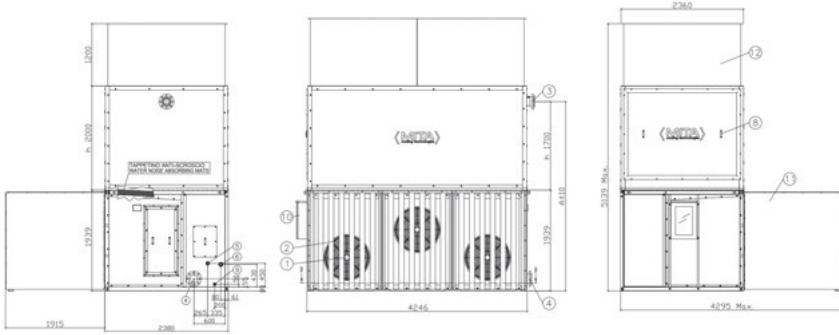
Selection card and drawing of a cooling tower: Parts: 1 – fan, 2 – fan grid protection, 3 – water inlet, 4 – water outlet, 5 – make-up, 6 – over flow, 8 – removable panel, 9 – drain plug, 10 – electric panel, 10 inlet air silencer, 11 – outlet air silencer [6,7]
